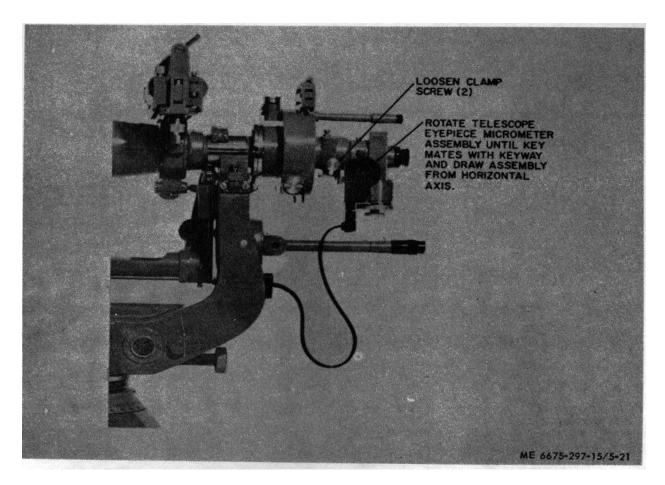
Telescope eyepiece micrometer assembly, removal and installation.
